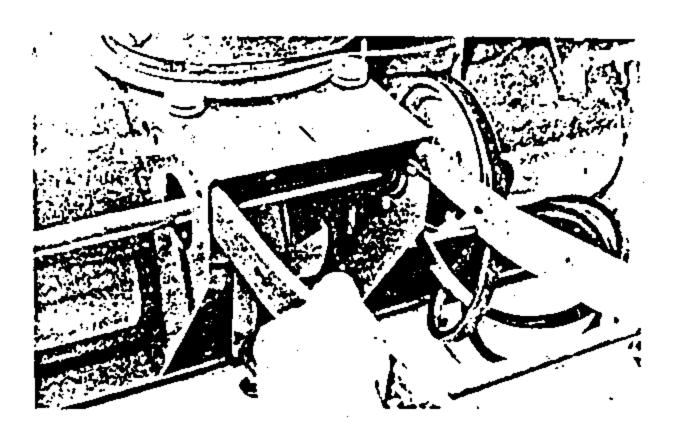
Slide Mounting Frame into Snowthrower Housing
